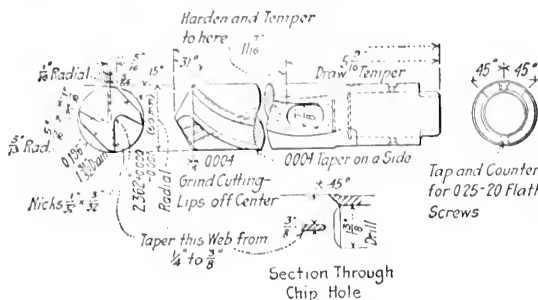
DETAILS OF 2.362-IN. HOLLOW-SHANK HIGH-SPEED STEEL DRILL
